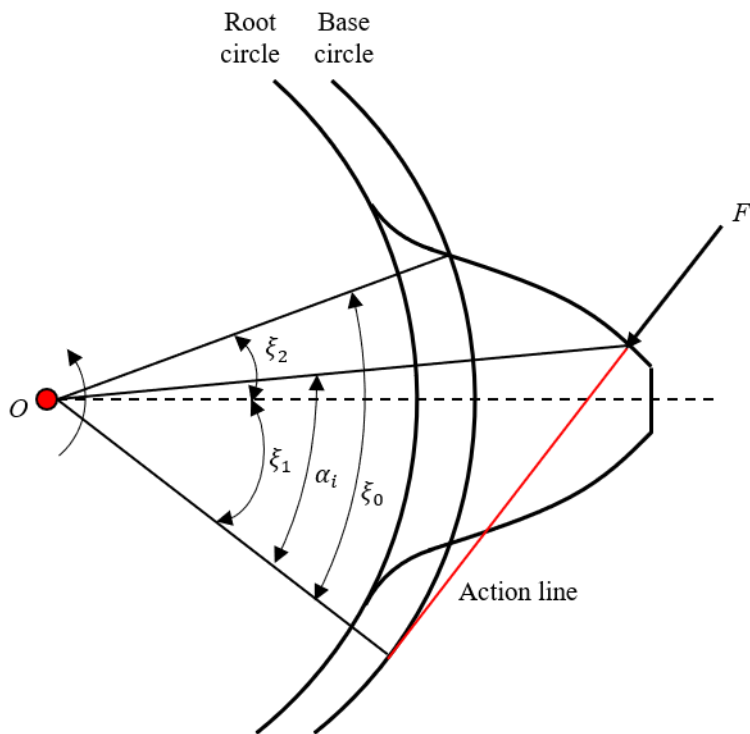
Instantaneous pressure angle and roll angle of spur gear.
